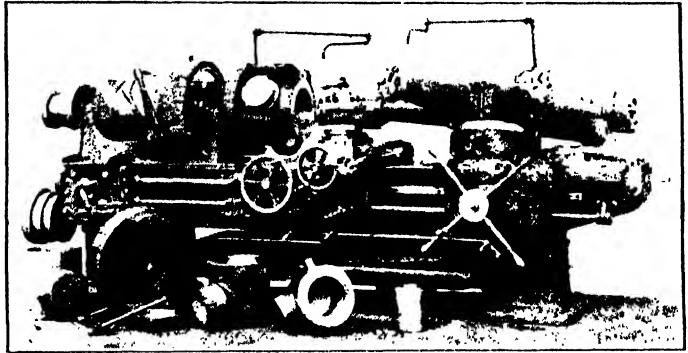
is a modified type which in the carriage bears some resemblance to American practice, but the lathe is made massively for work with high-speed steels. The belt cones are much larger than usual. The feed-shaft is below the lead-screw.
